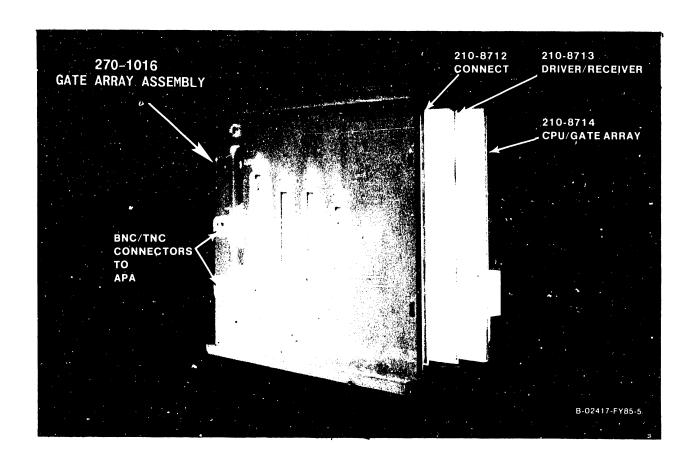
270-1016 6550 Gate Array TC Back Panel Assembly
